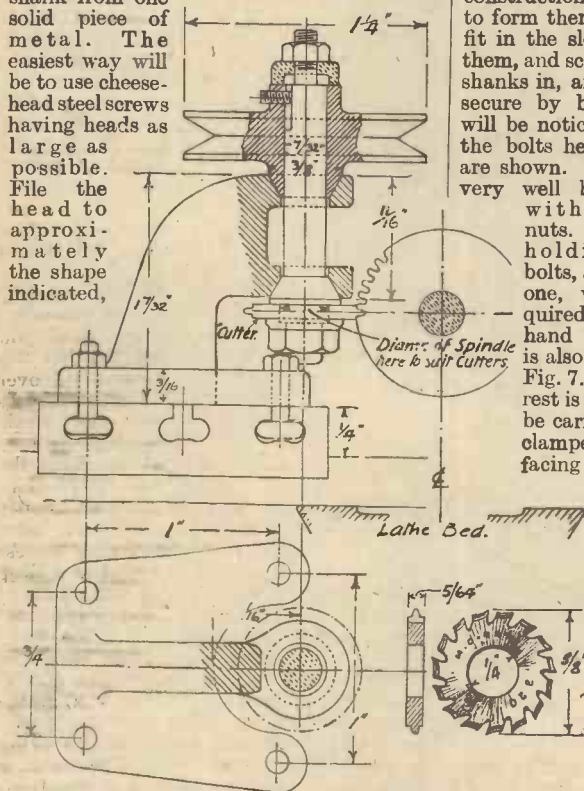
Side elevation and plan of gear-cutting attachment.
